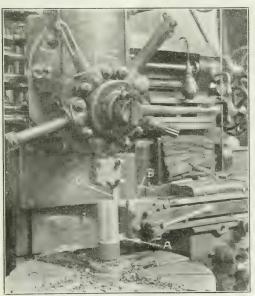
ROUGH TURNING SHELL FORGING ON "BULLARD" VERTICAL TURRET LATHE
